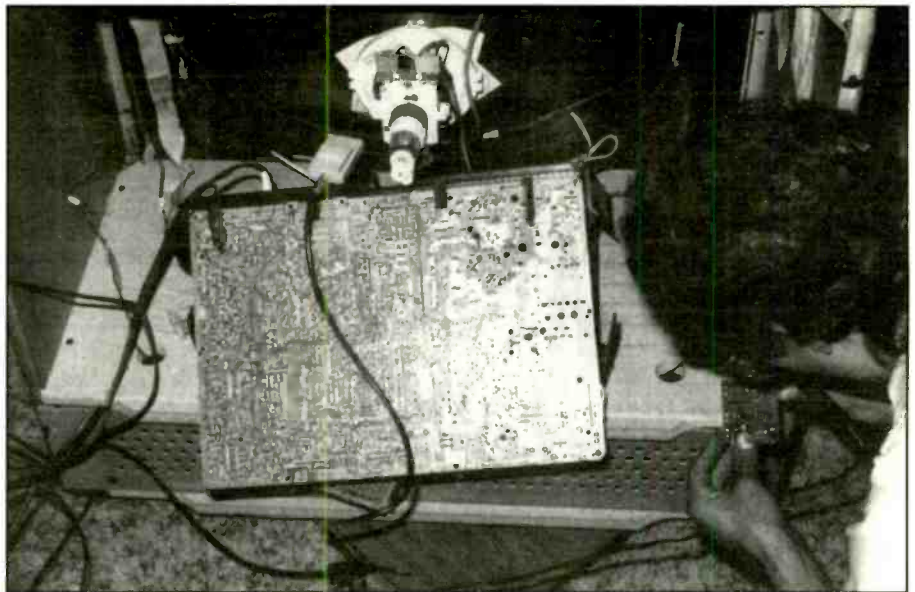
Inspecting the SIP diode PC board and soldering connections.
